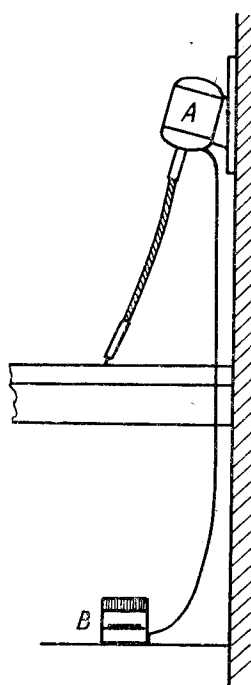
Wall mounting of motor ("A") with hand-piece at bench top level, and position of foot switch ("B")
